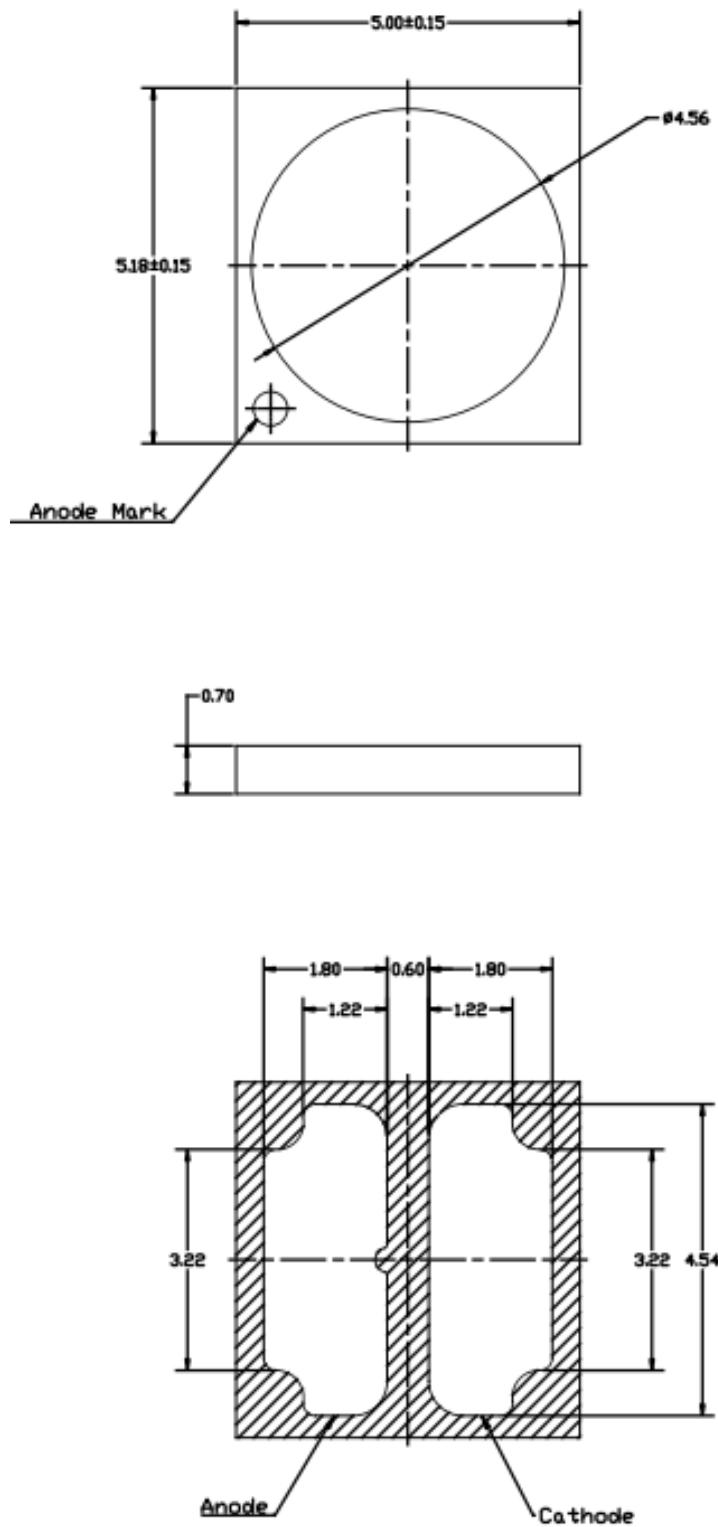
Mechanical drawings for the LUXEON 5050 (all dimensions in millimeters).
